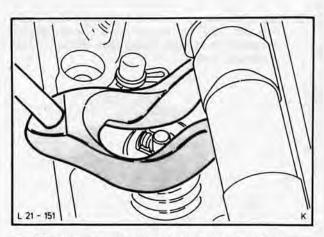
Remove valve collets, spring retainers and springs, using Special Tool 21–005.
